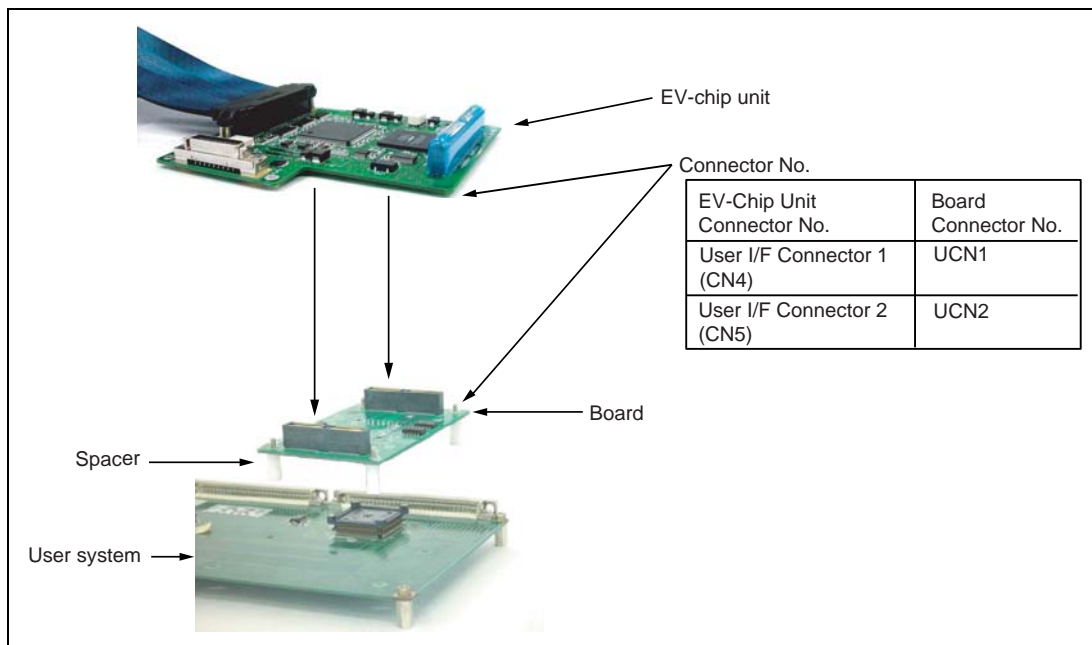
Connecting User System Interface Board to EV-Chip Unit
